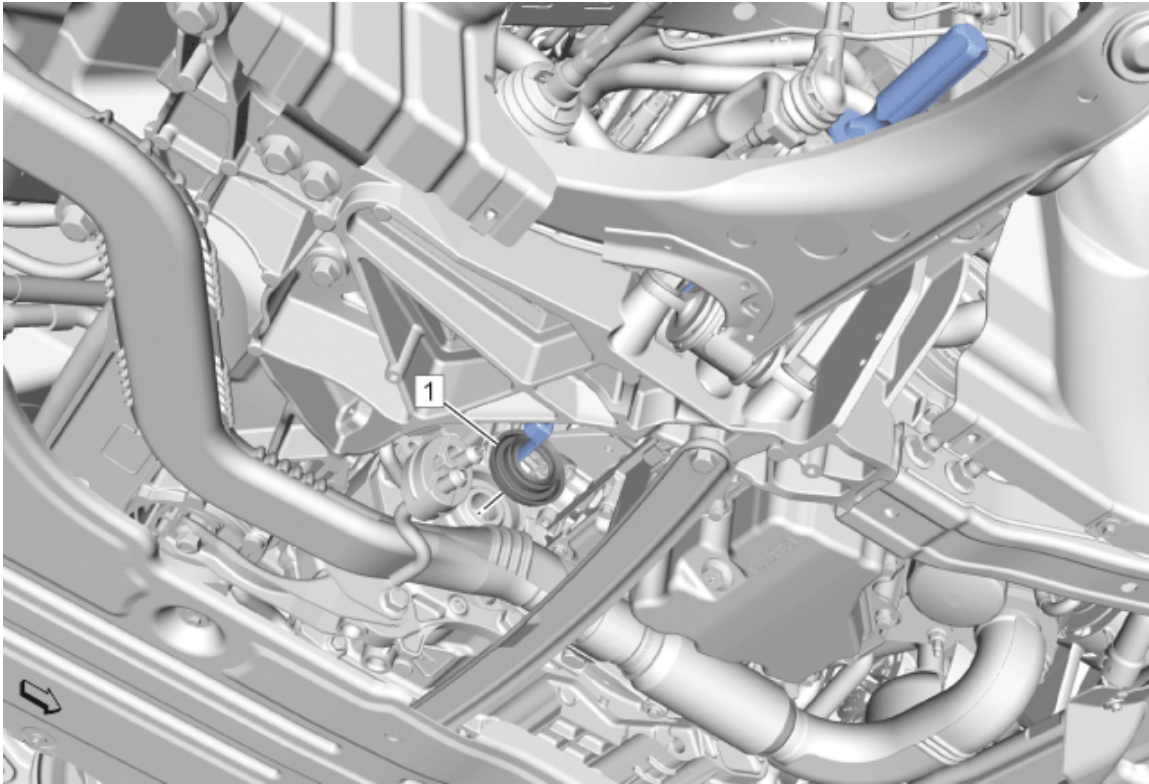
Front Wheel Drive Shaft Seal - Right Side
